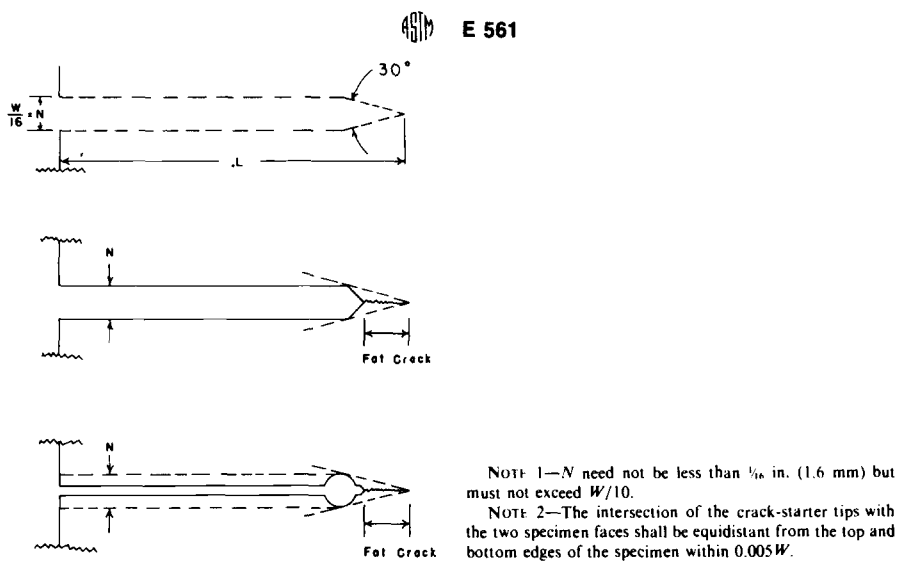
Envelope for Crack-Starter Notches and Examples of Notches Extended with Fatigue Cracks.
